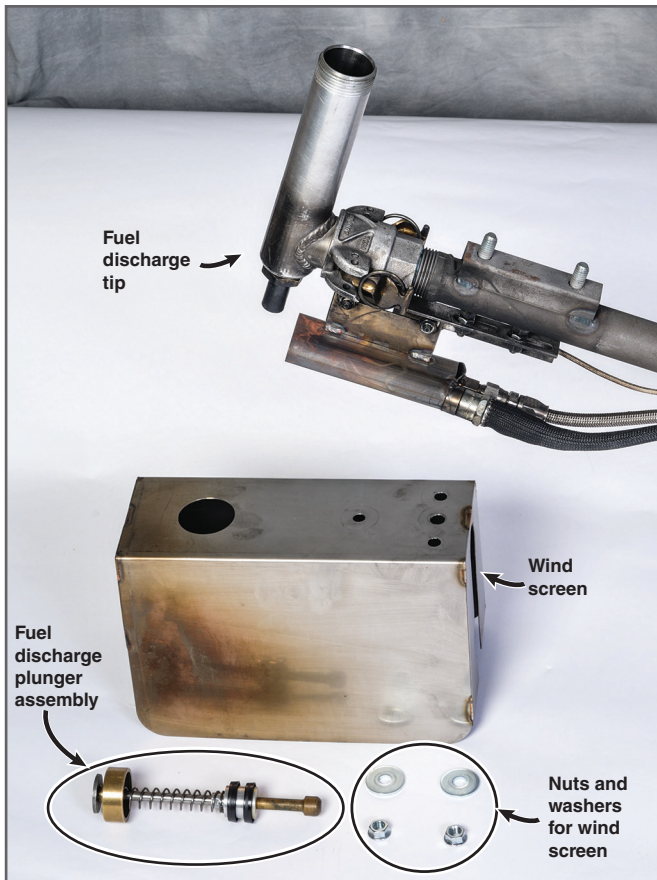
The end of the igniter arm with the windscreen removed and the fuel discharge tip disassembled. The ignition system attaches to the underside of the igniter arm. The fuel discharge plunger assembly is shown in the foreground.
